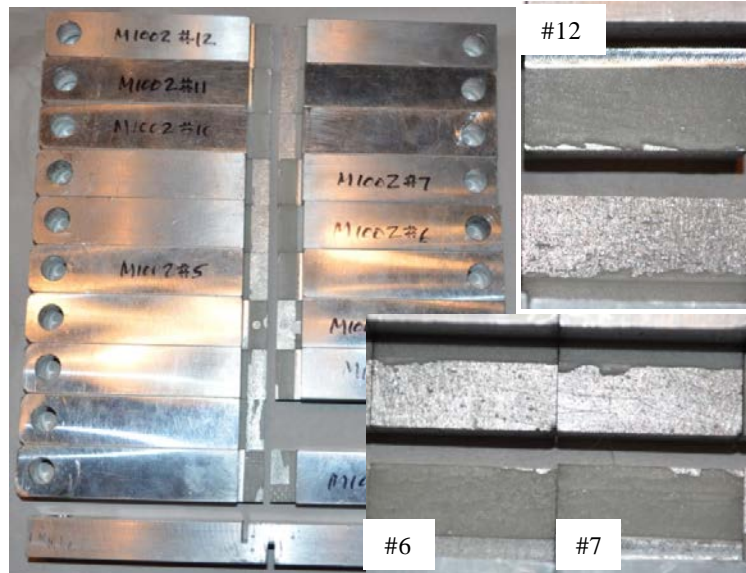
Typical failure surfaces for ASTM D5656 M1002-M2046 specimens showing adhesive failure between adherend and resin.
